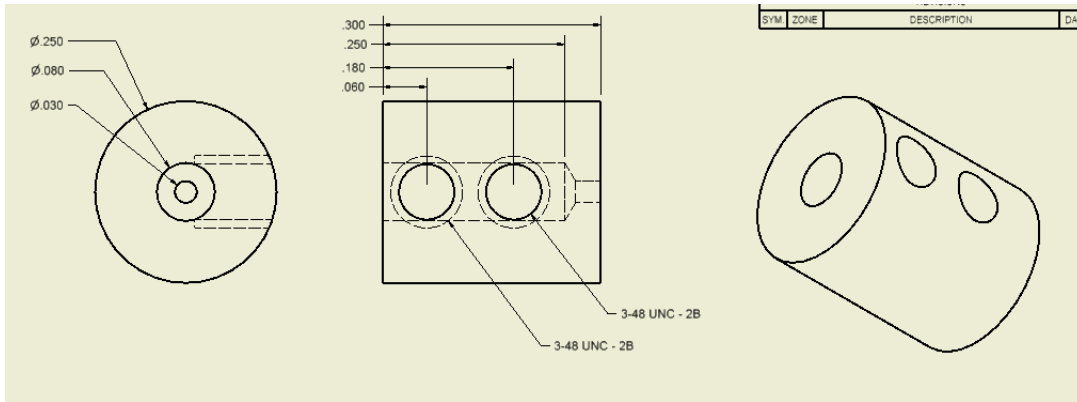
A mechanical drawing of the connector between the shaft on the rotation motor and the SpiderWire® fishing line. An image of this connector can be seen in Figure B.3 in the bottom left image.
